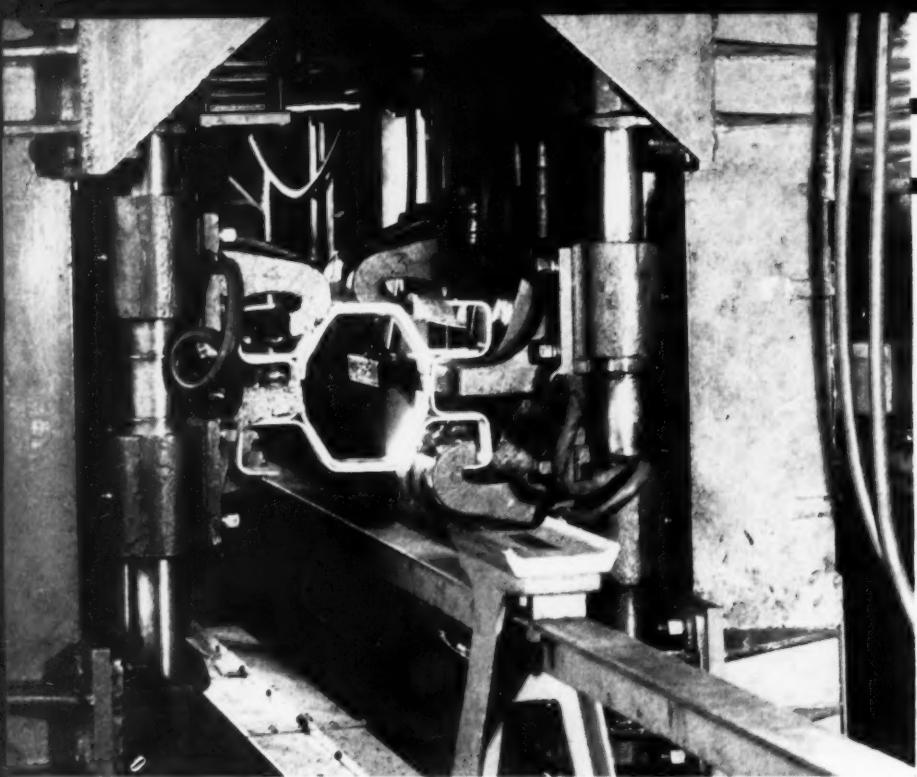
Multiple Type of "Shotweld" Machine which is Equipped with Eight Guns
